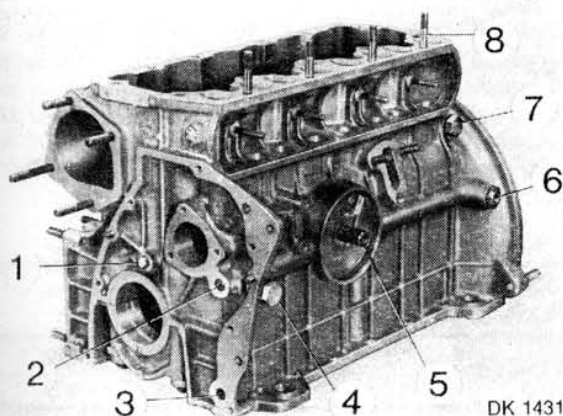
/1 - Oilways, their Accessories, and Water Jacket Plug Screw
